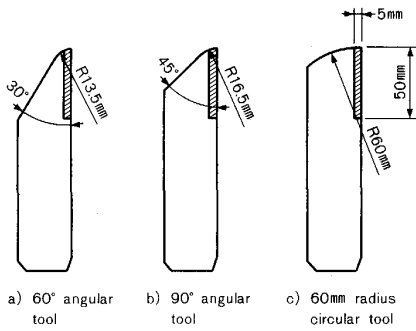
Tools for prereducing shearing tests of hot carbon steel.
